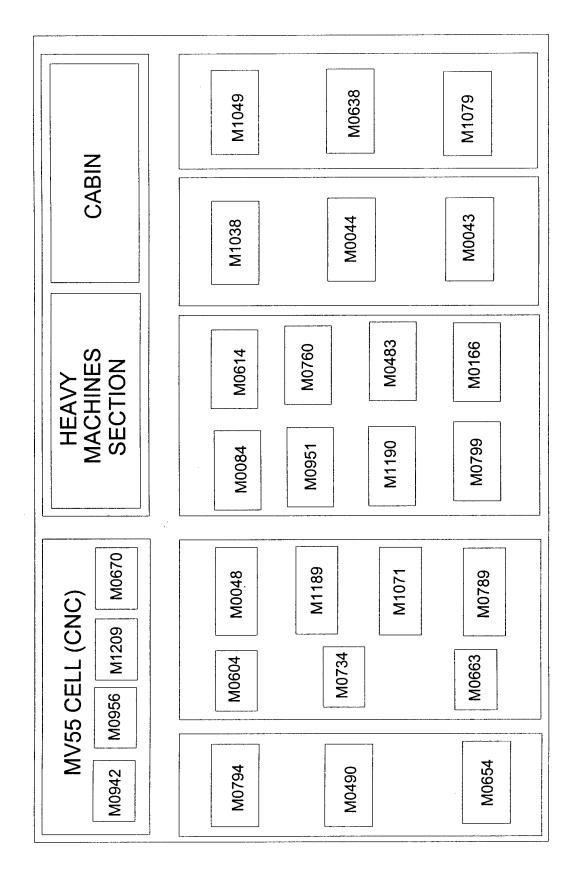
CUBICAL CELL - HEAVY MACHINES SECTION - LAYOUT
